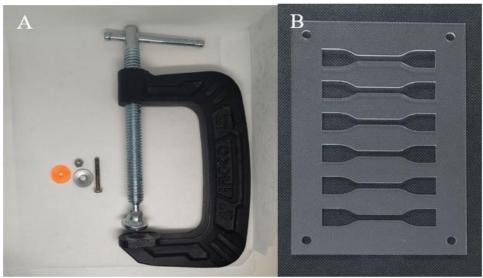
A) G-clamp, bolts, nuts, metal and rubber washers. B, acrylic mold.
